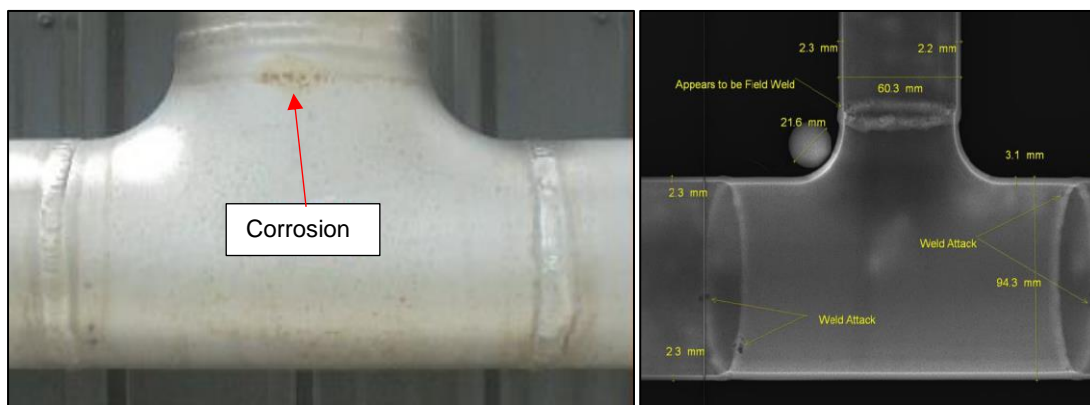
Example of visible corrosion on exterior of pipe and radiographic testing to inspect welds
